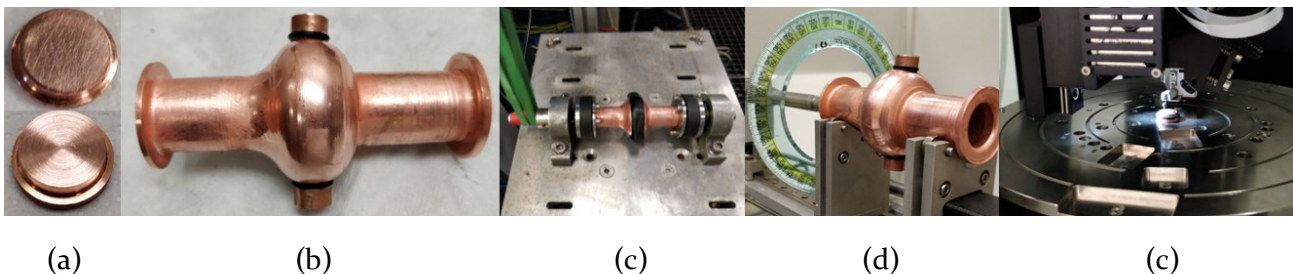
(a) Planar cylindrical samples, (b) dummy cavity with holes, (c) cavity VT processing, (d) cavity microscope inspection, (e) samples profilometer surface analysis
